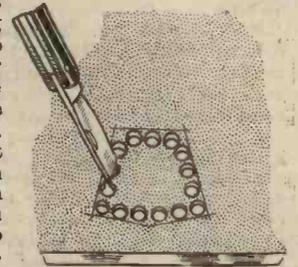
Trimming a hole in a panel with a pen-knife.
